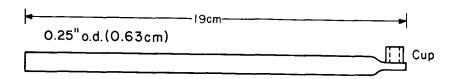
Measuring spoon: Flatten cup end in vise, solder 0.25" (0.63 cm) length of 0.25"-diameter copper tubing on to flattened surface.
